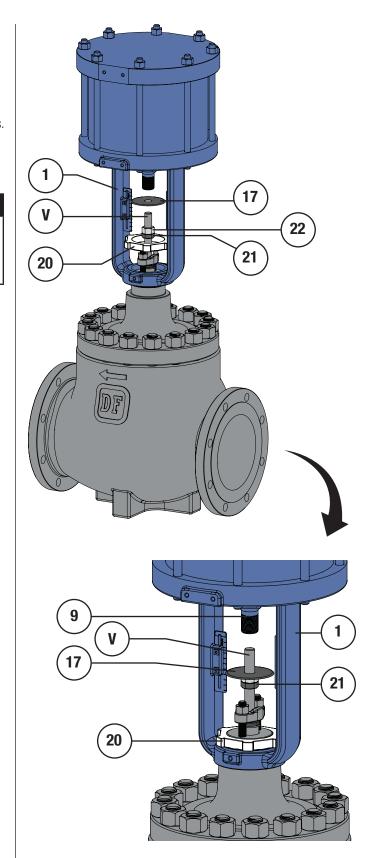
Size 113 Actuator Mounting (3-9/16" Yoke Boss)
